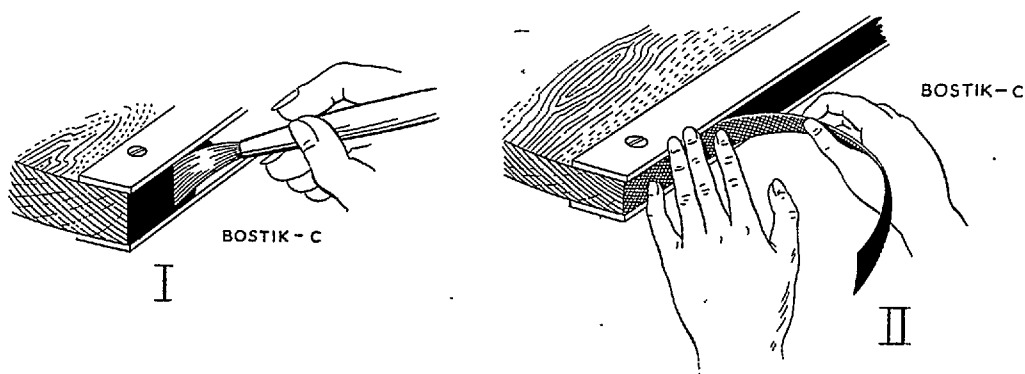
Attachment of sealing strips to bomb-bay doors, etc.
